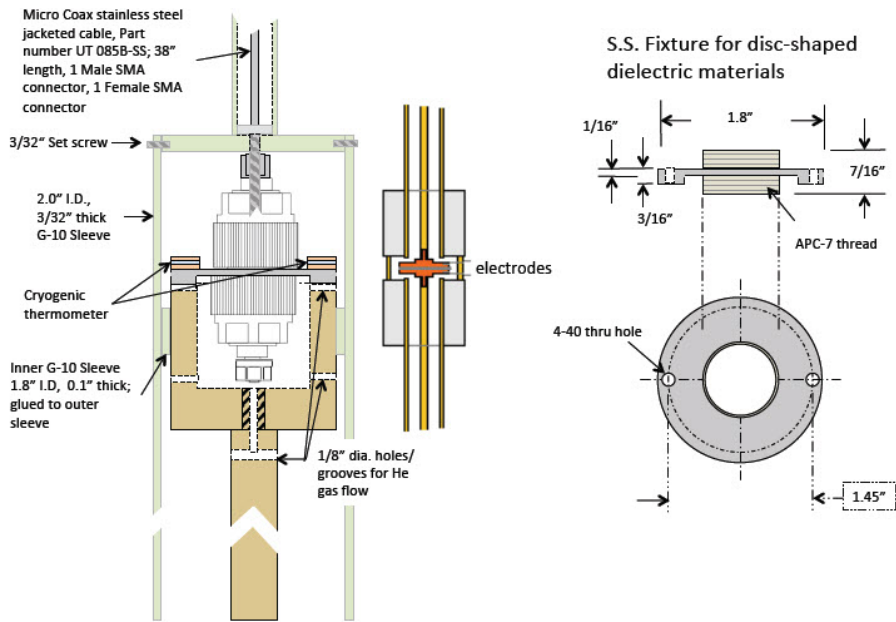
Same view of probe head assembly as in Figure 5 with the electric permittivity probe head installed. Dimensions of the s.s. ring fixture that form the cavity of the probe are shown on the right.
